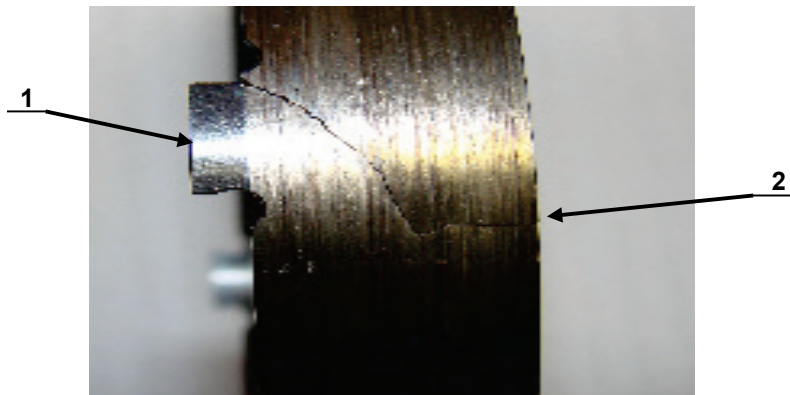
Cracked sleeve fixing the rolling bearing outer race to the turbine engine body:
